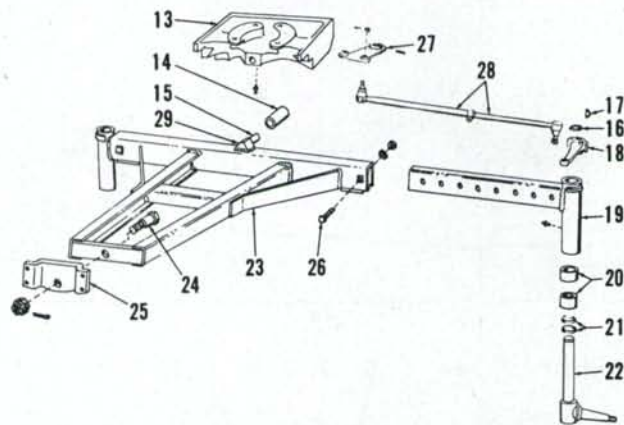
Exploded view of typical adjustable axle and associated parts. Radius rod (23) is welded to axle main member (29).
